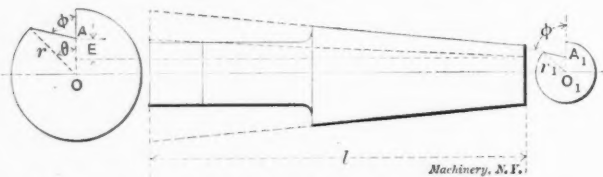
Diagram for Calculating Setting Angle for Taper Reamer.
